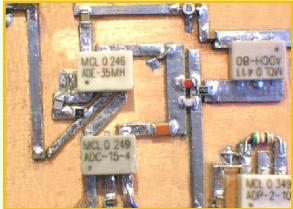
The strips form "traces" similar to a PCB for orderly mounting of the SM components. Often, diagonal runs will be more convenient, as shown here.
